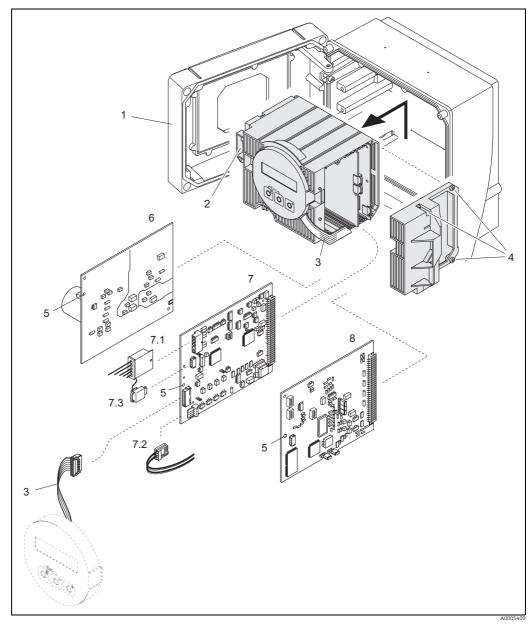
Wall-mount housing: removing and installing printed circuit boards
